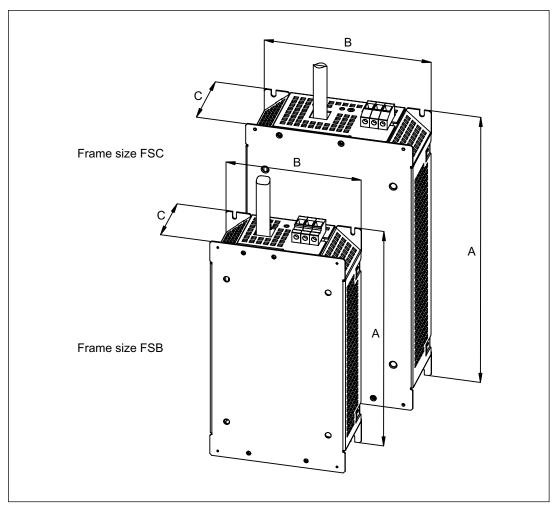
Dimension drawing: Motor reactor, frame sizes FSB and FSC
